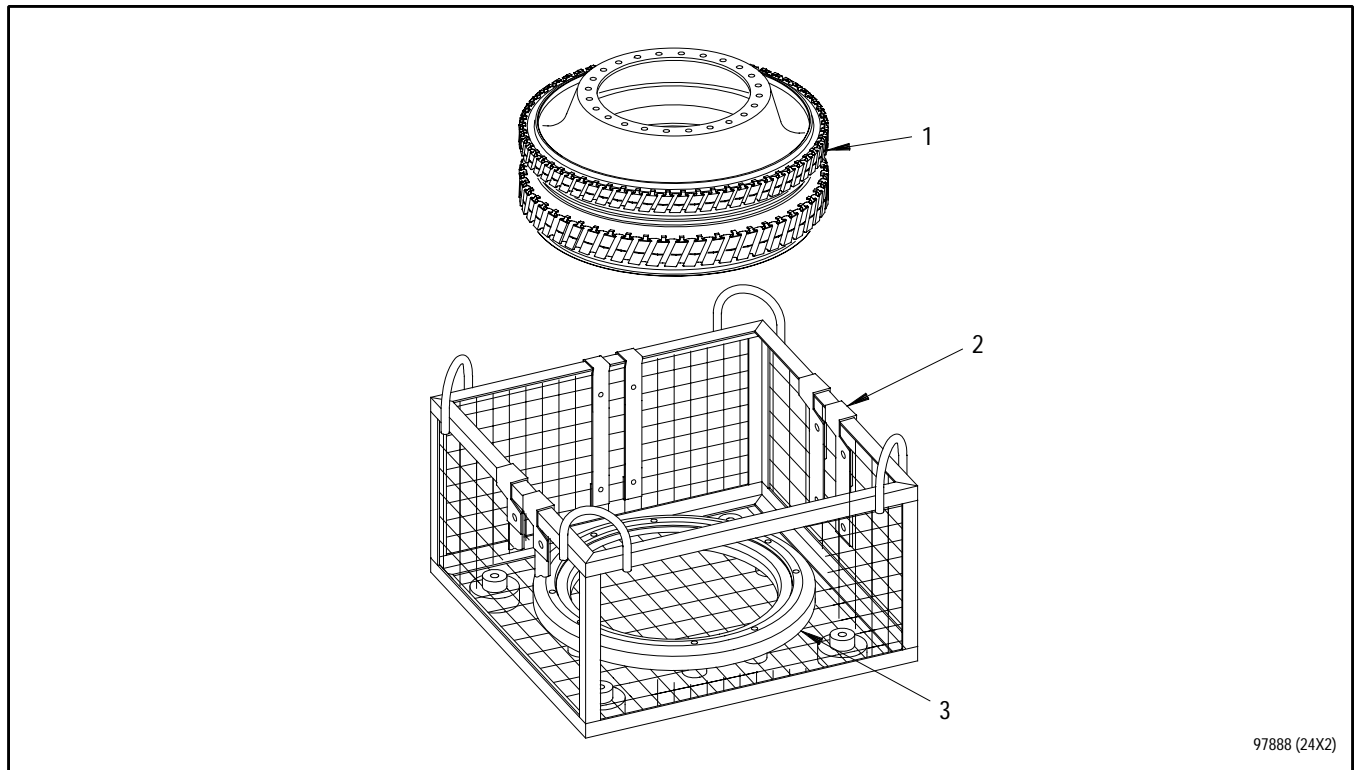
Rear Compressor Front Disk-Drum Rotor Assembly - Masking
